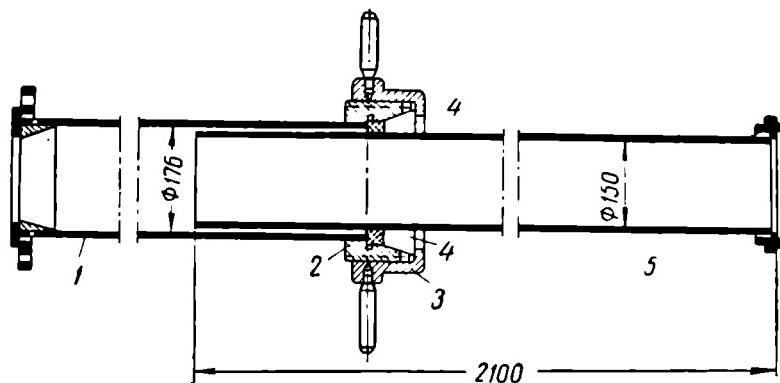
Telescopic installation for shortening pipeline sections in the stoping area
